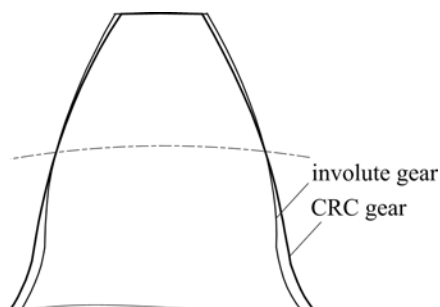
Tooth profile of CRC gear and involute gear; adapted from [88]
